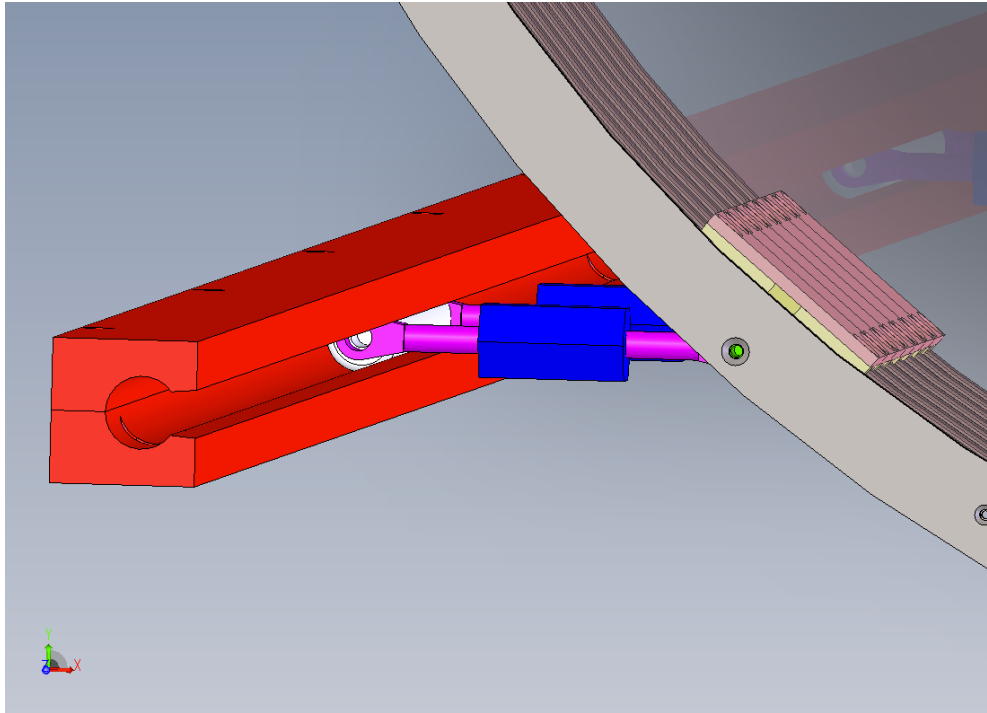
CAD image of the side rail design. The red piece connects to the vacuum chamber rail, the pink and blue pieces make up the clevis mechanism and the white piece is a bar that slides along the length of the rail.
